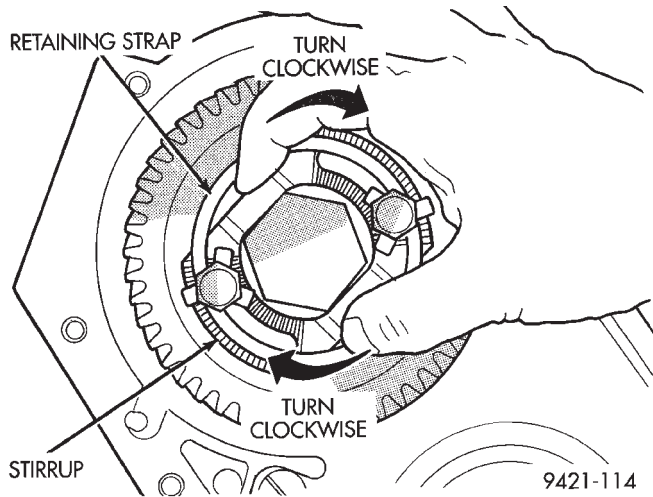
Turn Stirrup Clockwise Against Flats Of Output Gear Retaining Bolt
